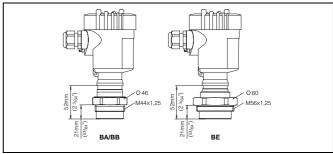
VEGABAR 64, threaded fitting for the paper industry: BA/BB = M44x1.25; BE = M56x1.25
